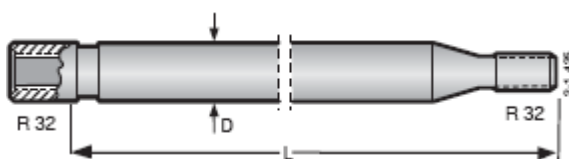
Guide tube (Top Hammer Drilling Tools Product Catalog).
